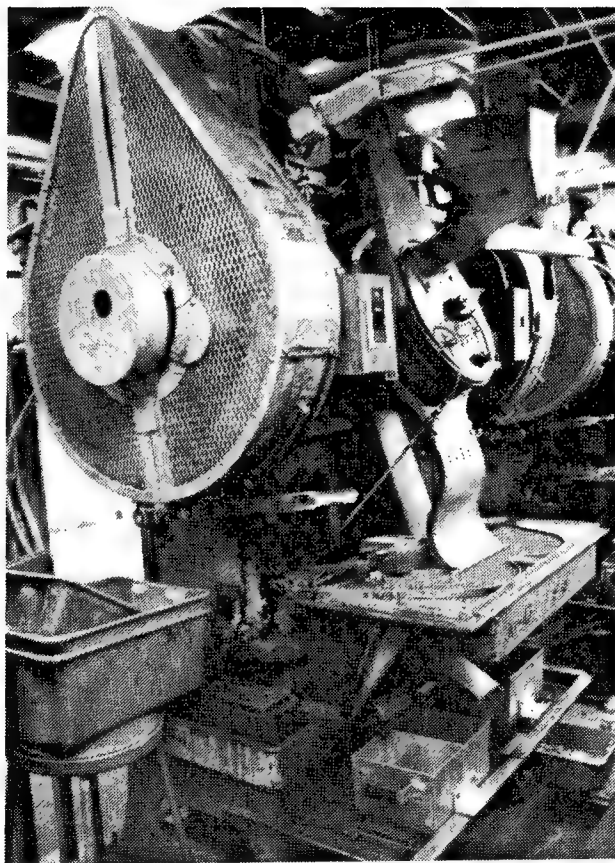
Building 2: 7.62 mm Bullet First Draw Machine.
